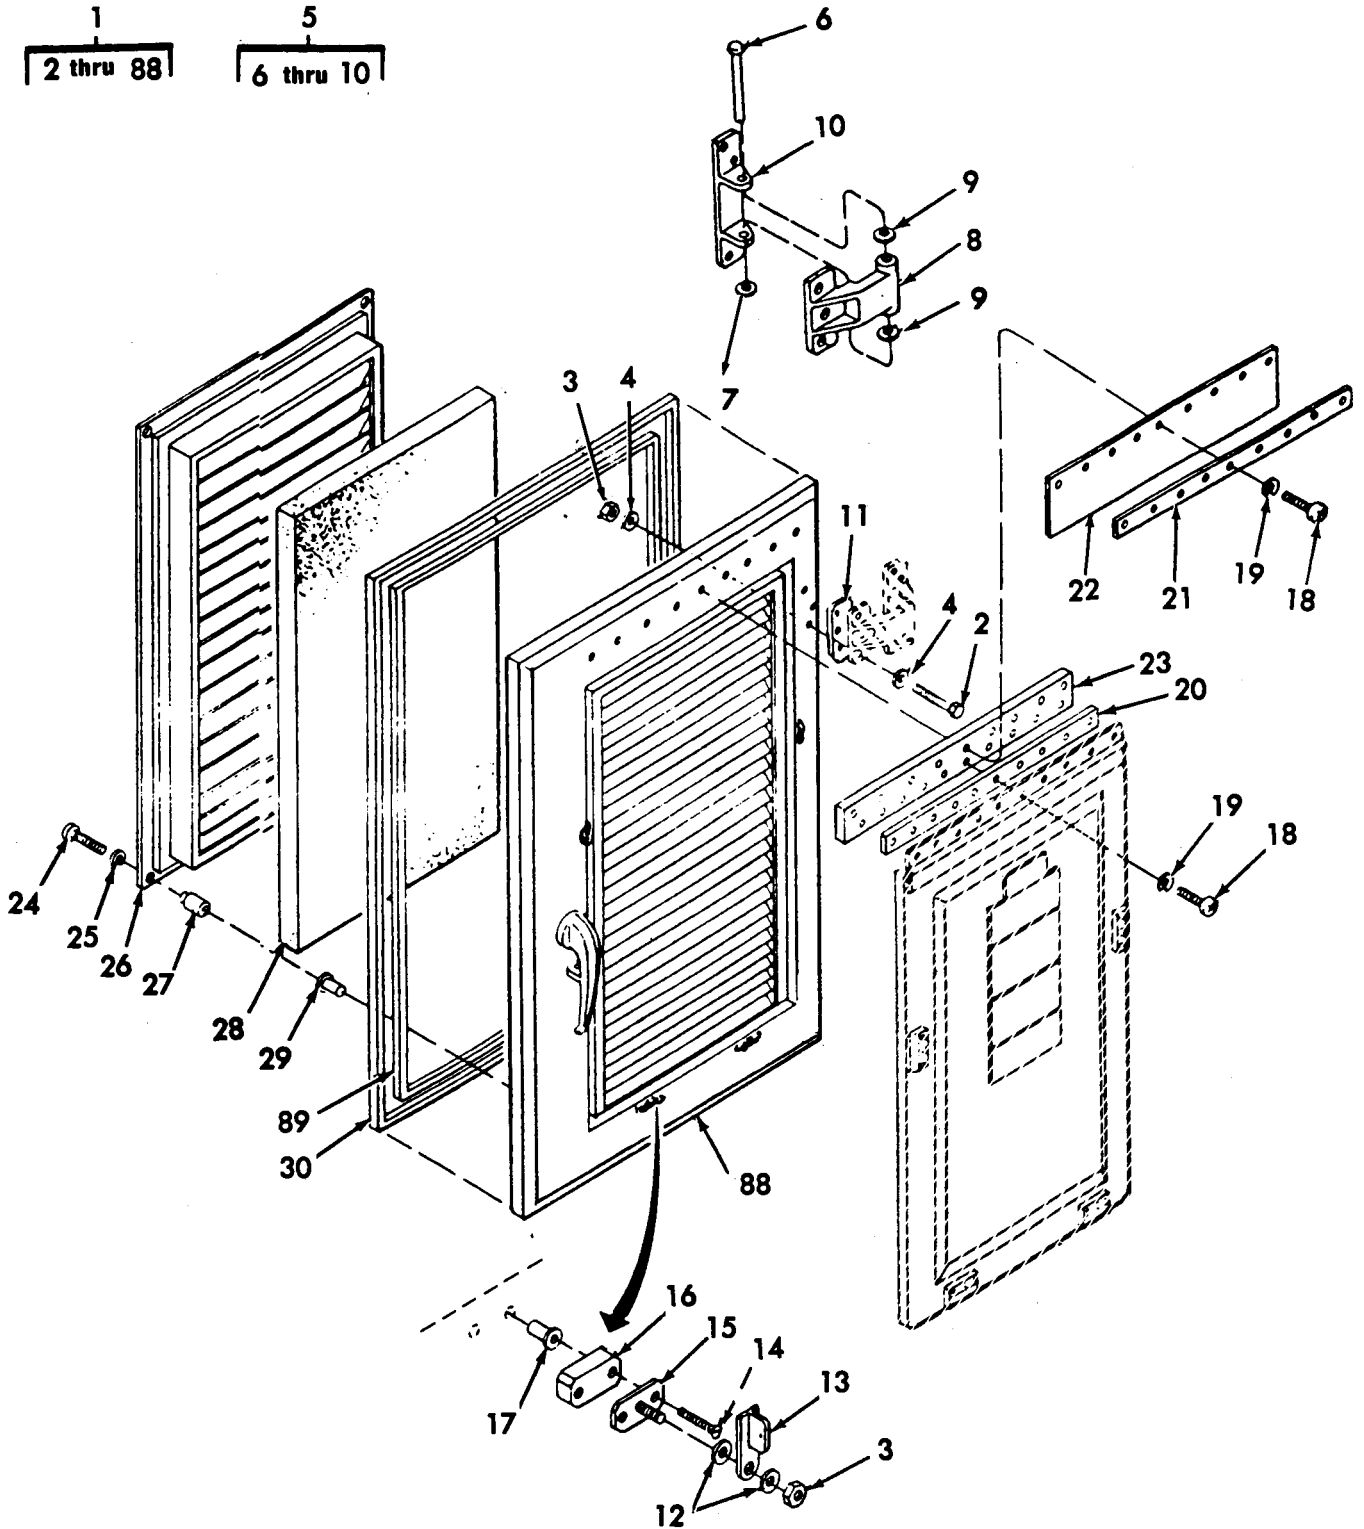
Inner Door Assembly (Sheet 1 of 4)
